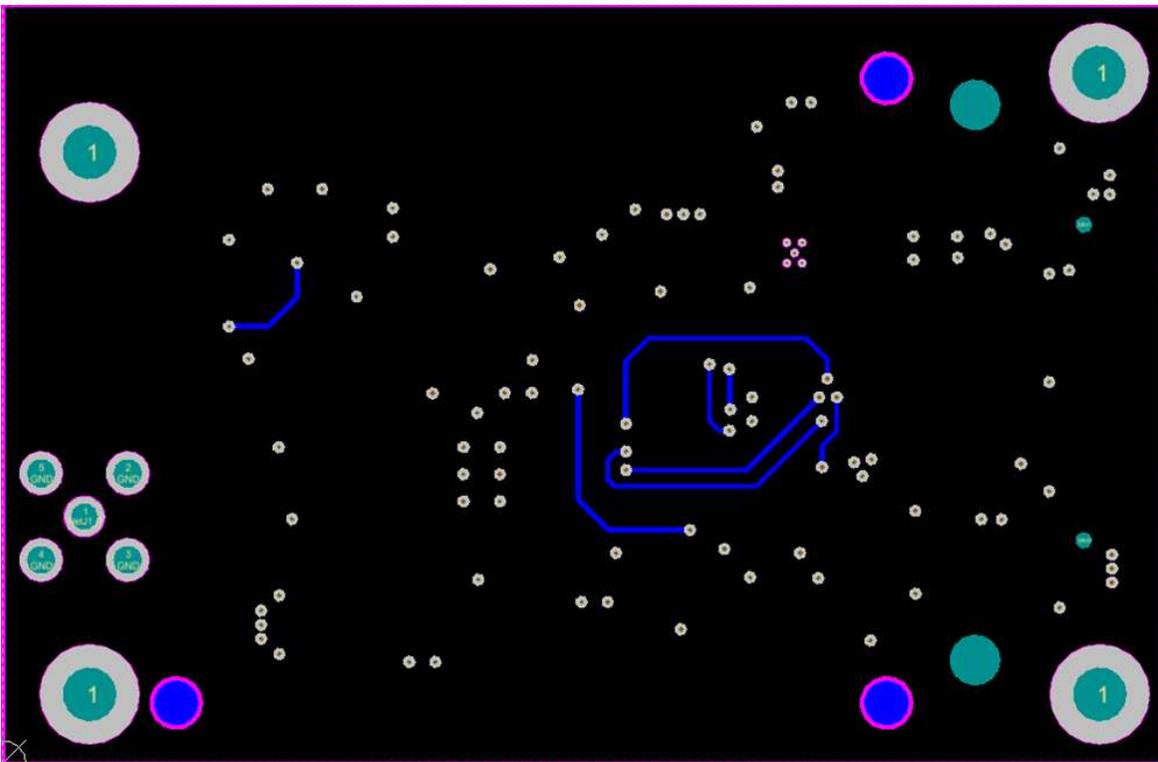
ADS8681EVM PCB Layer 4 – Bottom Layer
